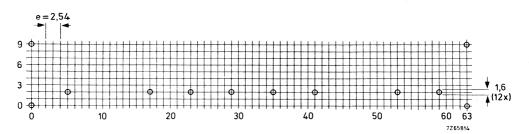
Hole pattern of the printed-wiring board (viewed on solder side).
